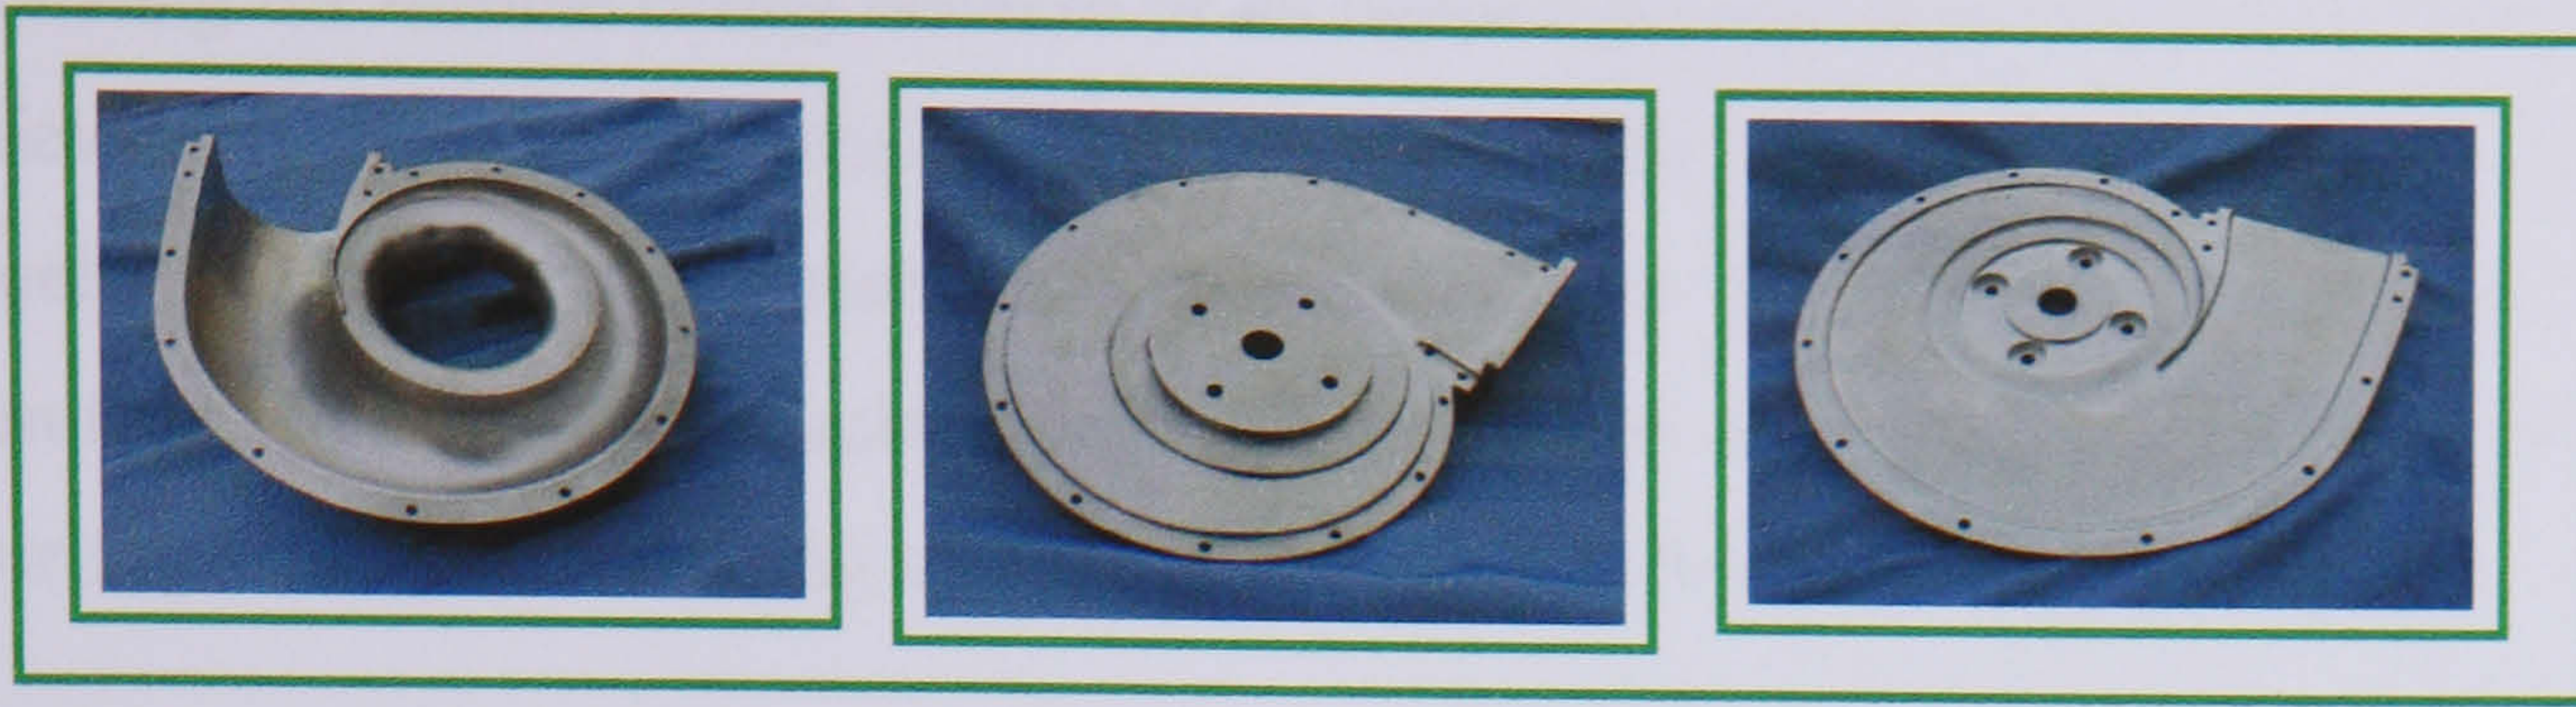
NOZZLE-LESS CASING MACHINED FROM STAINLESS STEEL ALLOY, TYPE 304L
